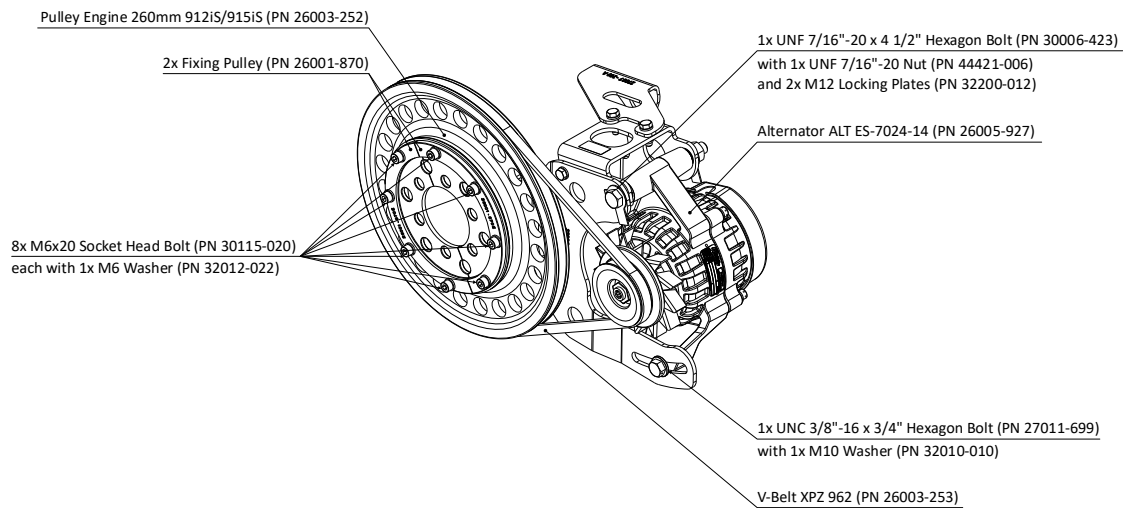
Isometric View Ext. Alternator Kit 70A Rotax 915iS
